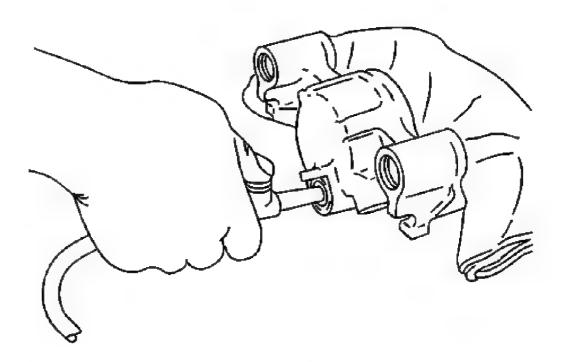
Removing Brake Caliper Piston Using Low Pressure Compressed Air Courtesy of GENERAL MOTORS CORP.
